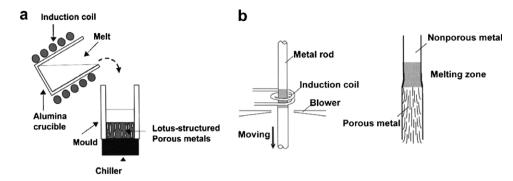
Fabrication techniques of lotus-type porous metals in a hydrogen gas atmosphere: (a) mould casting technique and (b) continuous zone melting technique.
